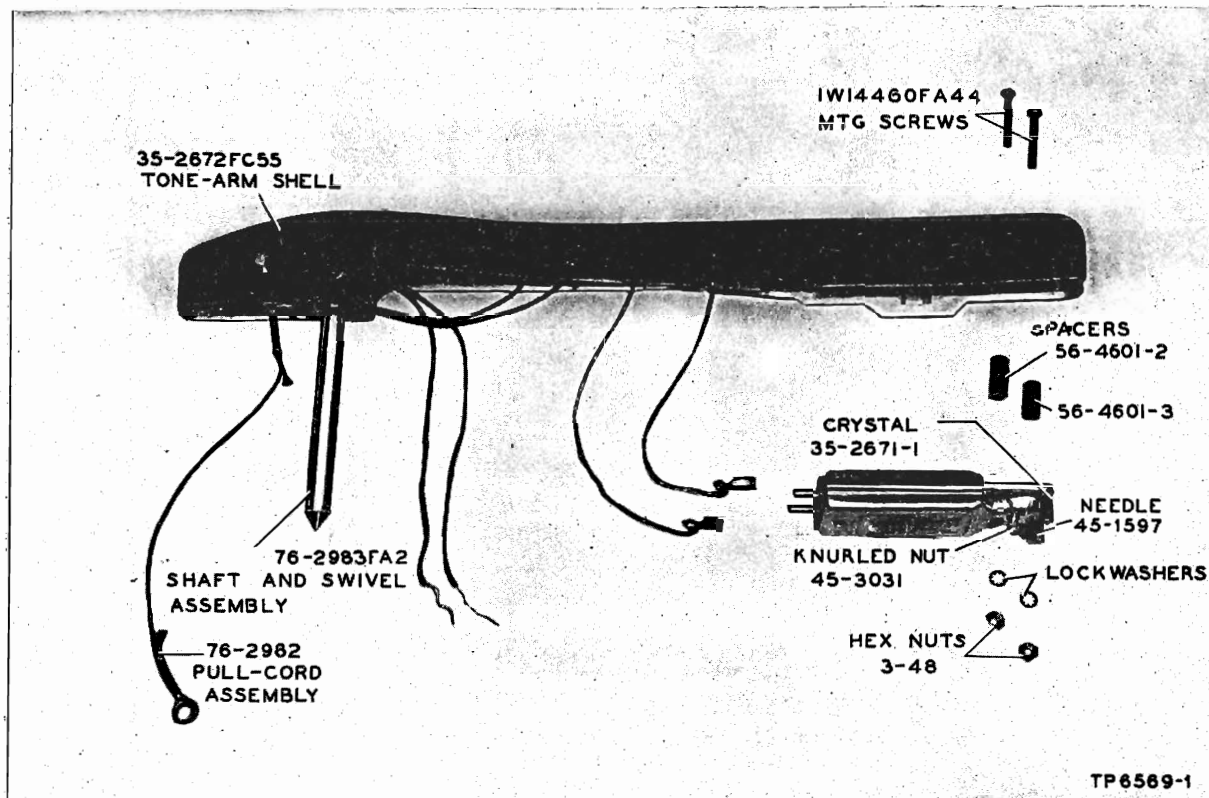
Record-Changer Tone-Arm Assembly, Part No. 35-2663-2
